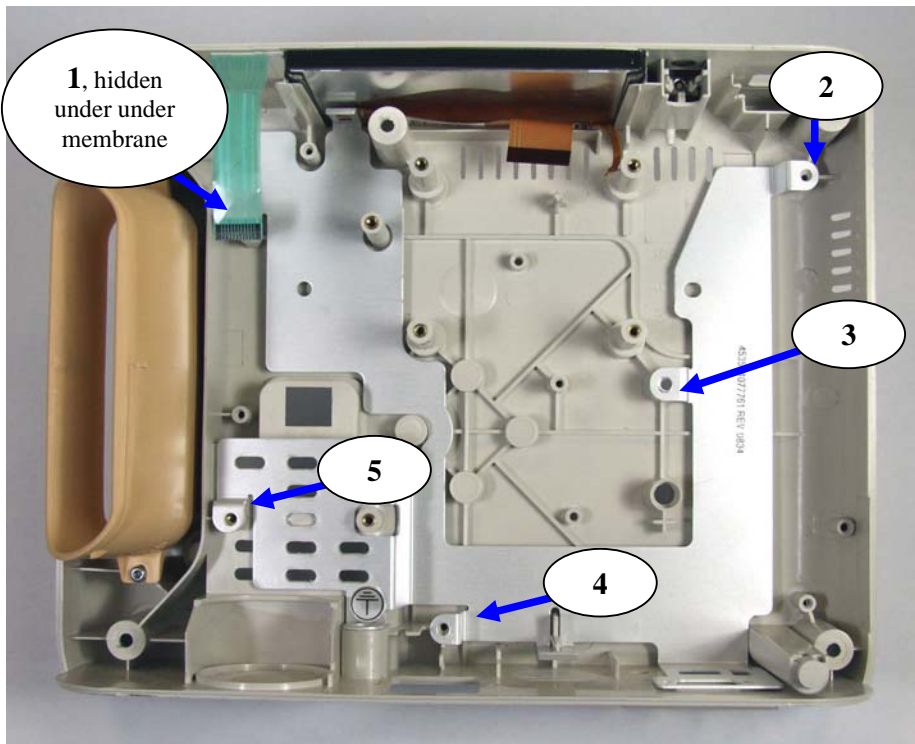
Sheet metal view (five mount locations, screws through various PCA's & sheet metal into tapped hole on bottom cover)
